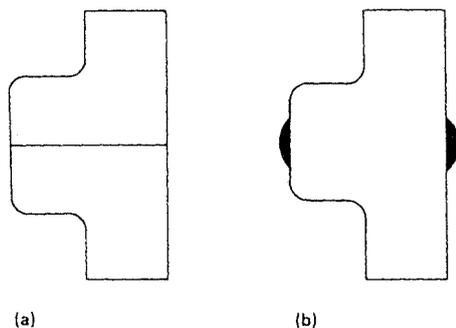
A butt joint used for hot tool welding, shown before and after welding.
